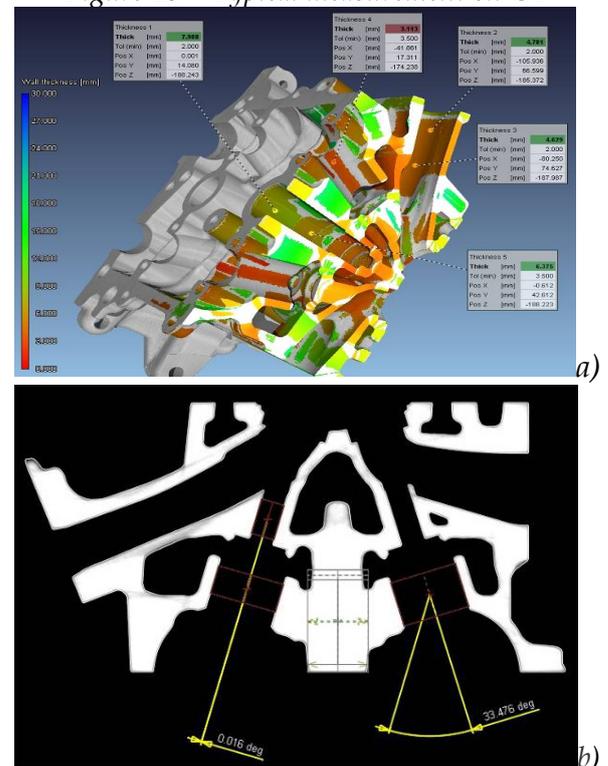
Engine head: a) automatic measurement of material thickness, b) example of dimensions
